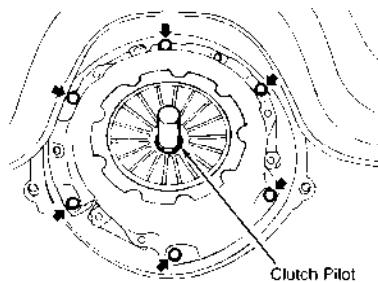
Removing & Installing Clutch On Flywheel (Typical)
